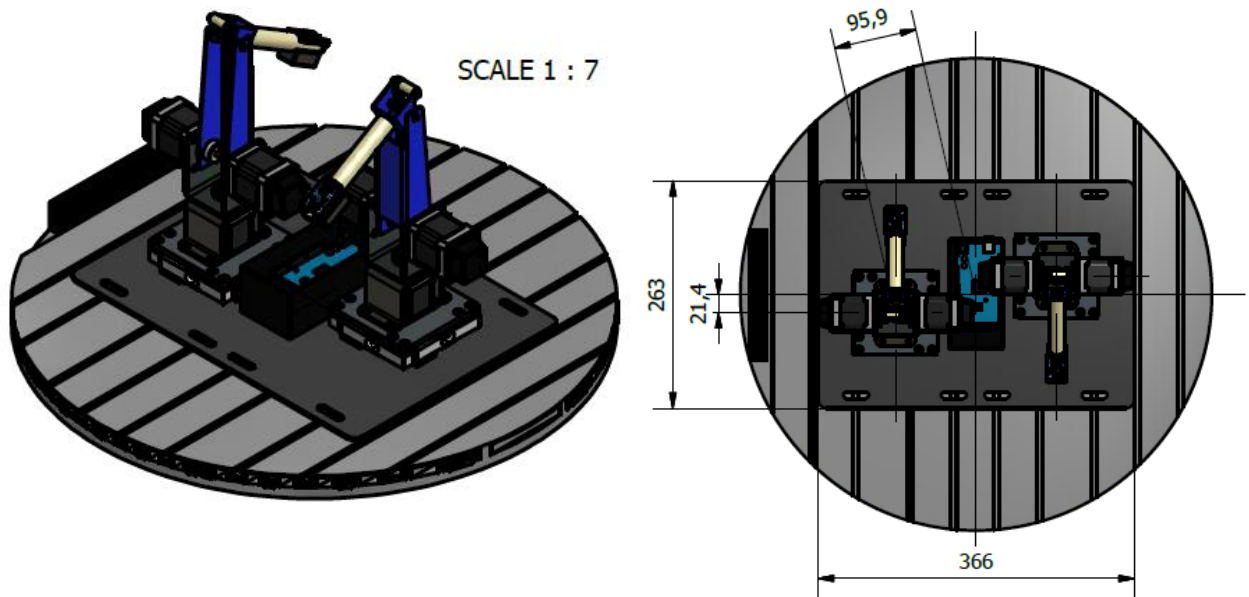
Robotic arm manipulator setup, sketch and dimensions (units in millimeters).
